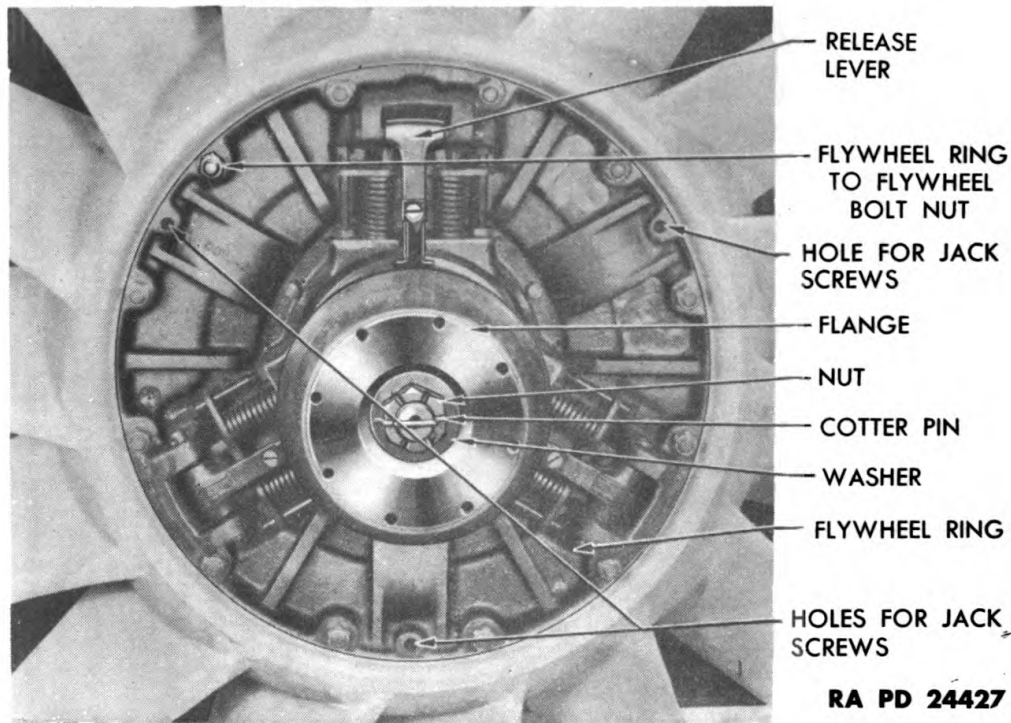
Clutch and Fan Assembled (Fully Enclosed Type)
